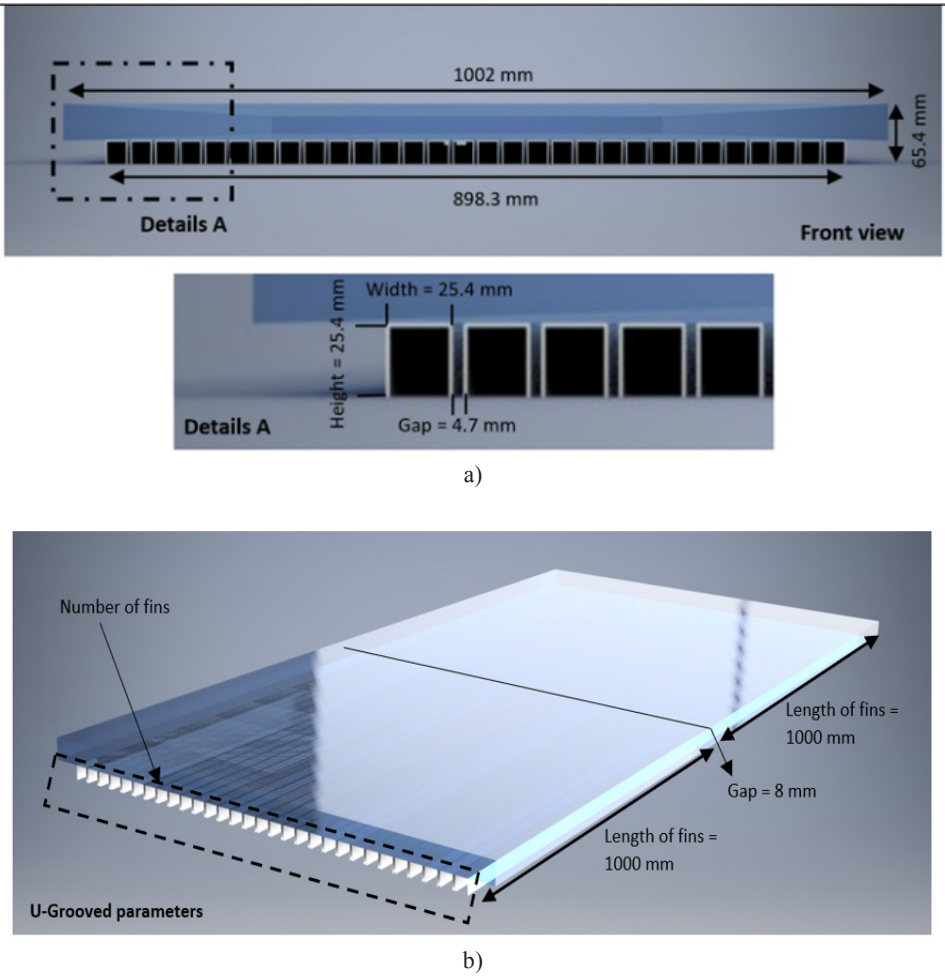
(a) Dimension details for U-grooved fins design (b) Geometry drawing drawn by modeler design
